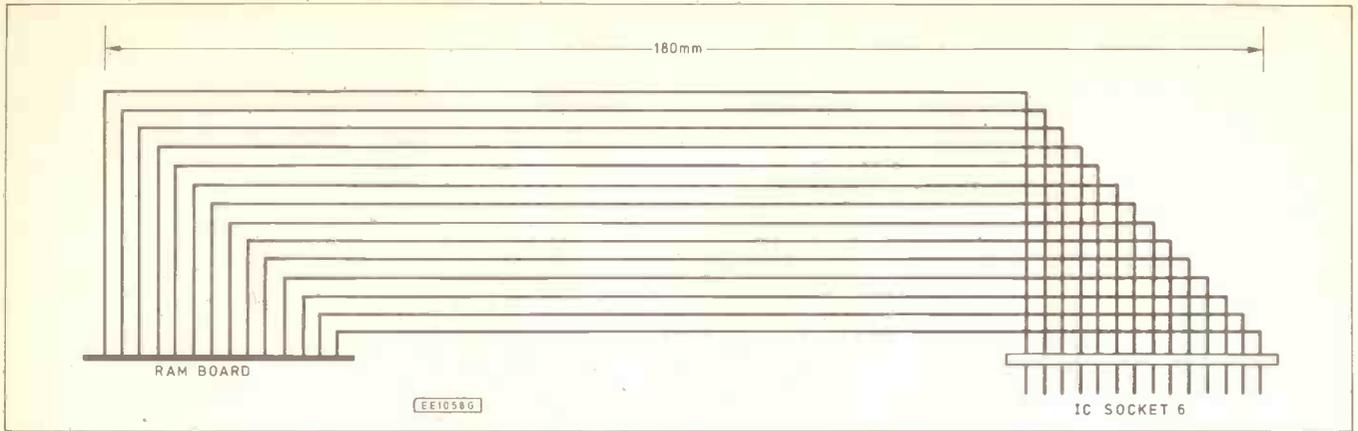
Dimension and wiring details for the interconnecting ribbon cable (two required) from the RAM board to the 28-pin i.c. connecting socket 6. Note that a single lead is taken from the board to pin 20 of i.c. socket 7 (see photo below).
